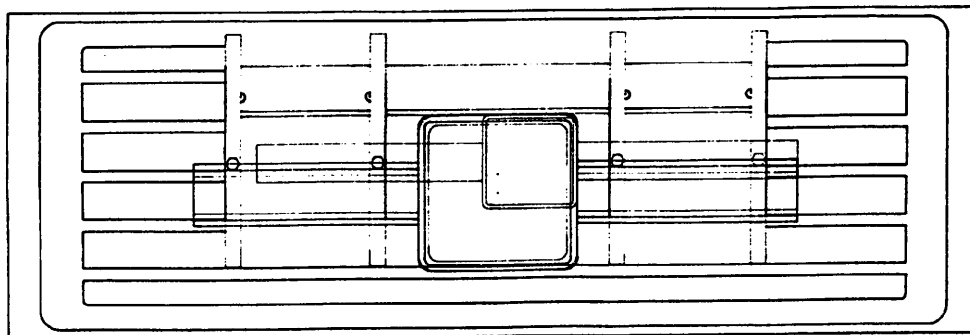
Details of the Welding Jig for SHS Joints.
